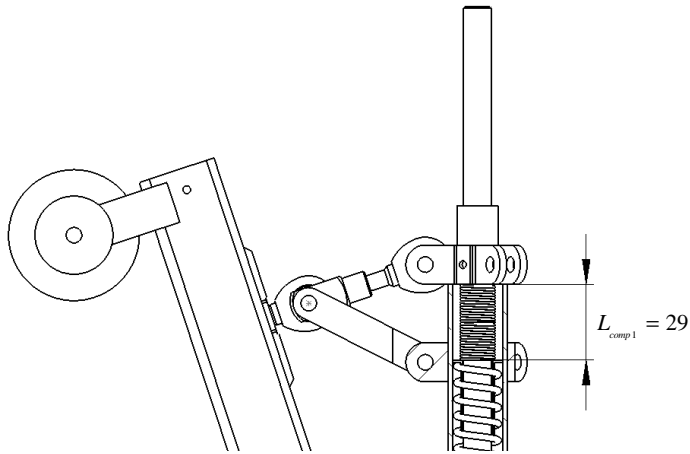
Final test configuration of the modified prototype showing compression spacer removed
